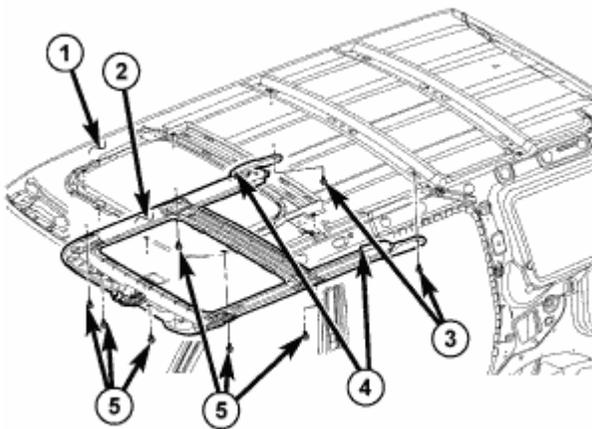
Roof Panel, Sunroof Module Assembly, Module Bracket Bolts & Fasteners
